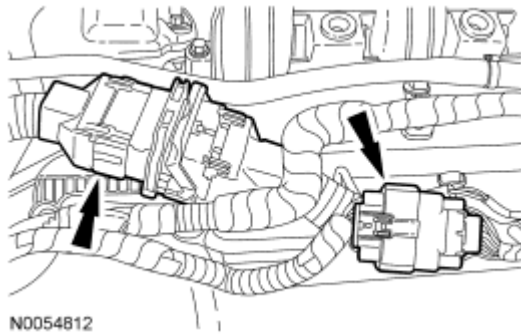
Identifying Engine Wiring Harness Electrical Connectors
